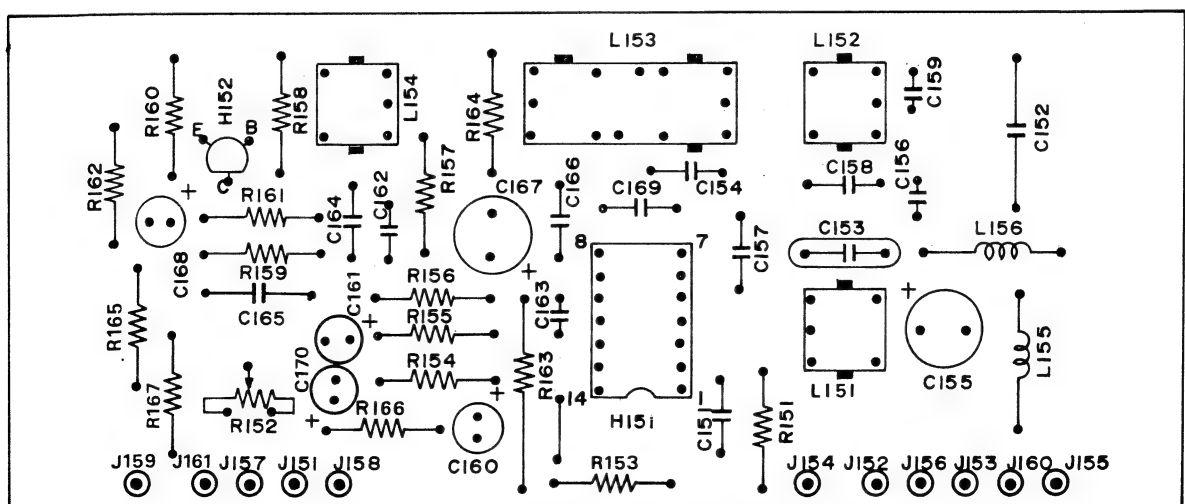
AM Tuner Unit Assembly P150 Component Locations
